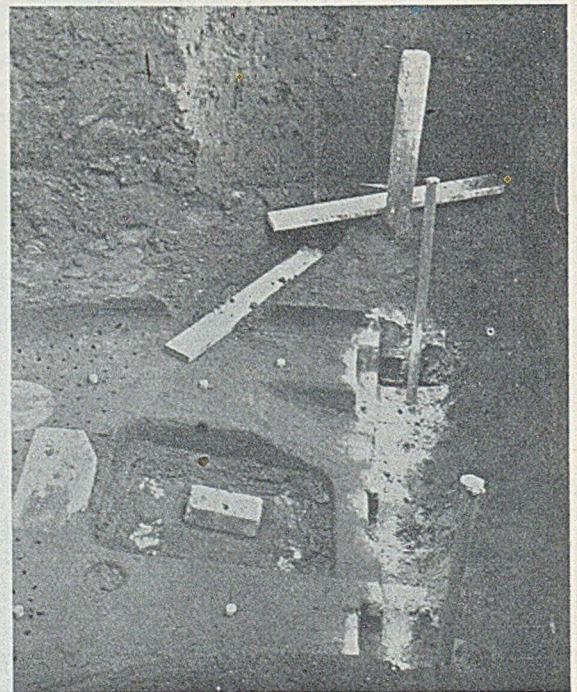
Another View of the Base of the Mould for the Cylinder, showing the Arrangements for Gating.
